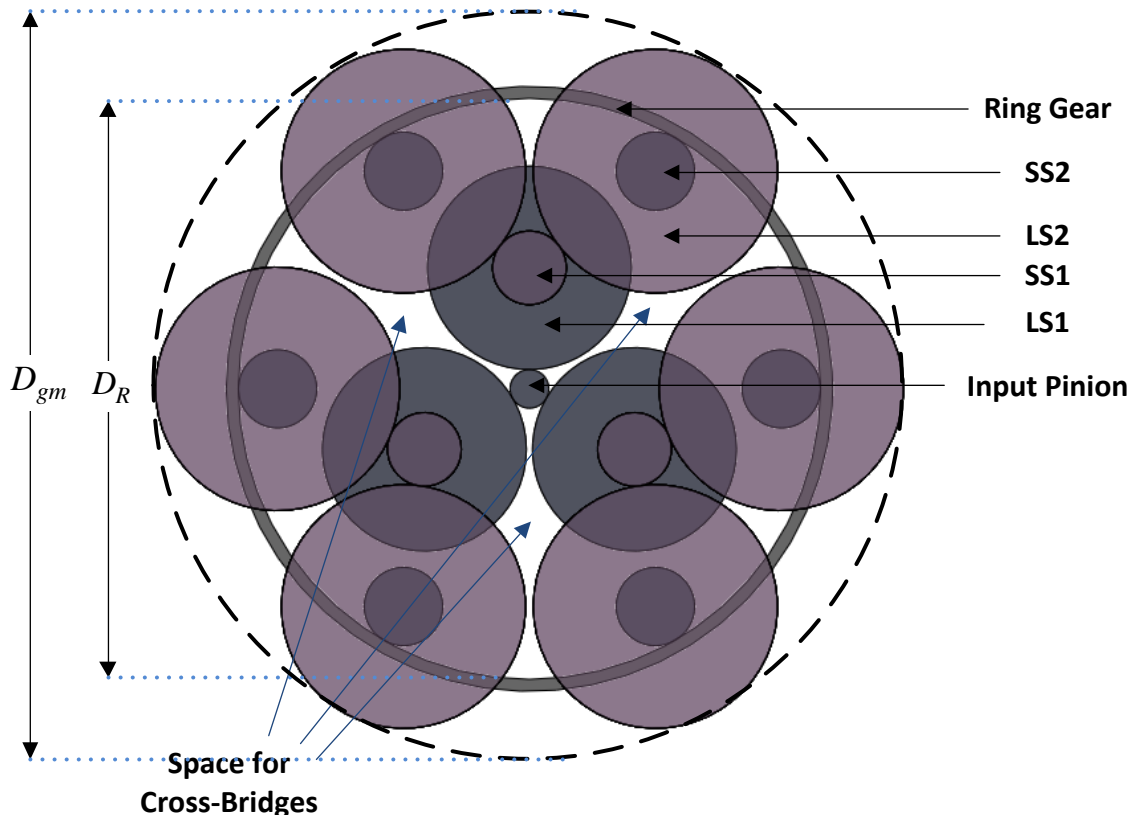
Layout of gears in a P-Type 2-Stage SCGT (6 Second Stage Amplifier Gears)
